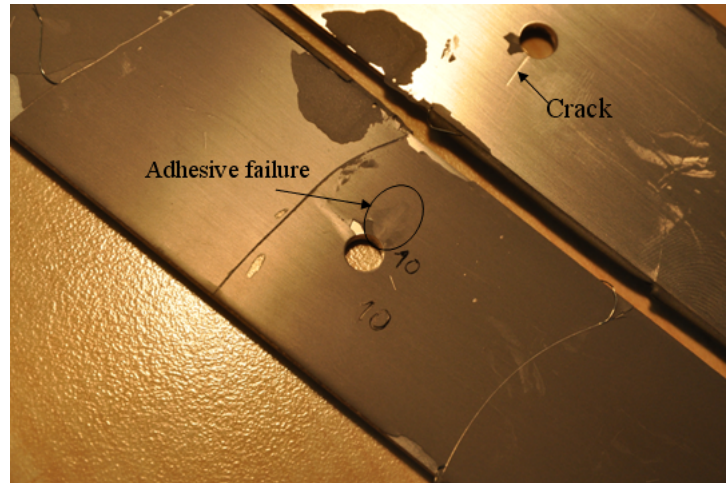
Digital image of a multi-layered tensile specimen (specimen 10) taken apart after the fatigue experiments. The image shows a 6 mm long crack at the fastener which grew in one layer and an area of possible adhesive damage (black ellipse) on the opposite layer.
